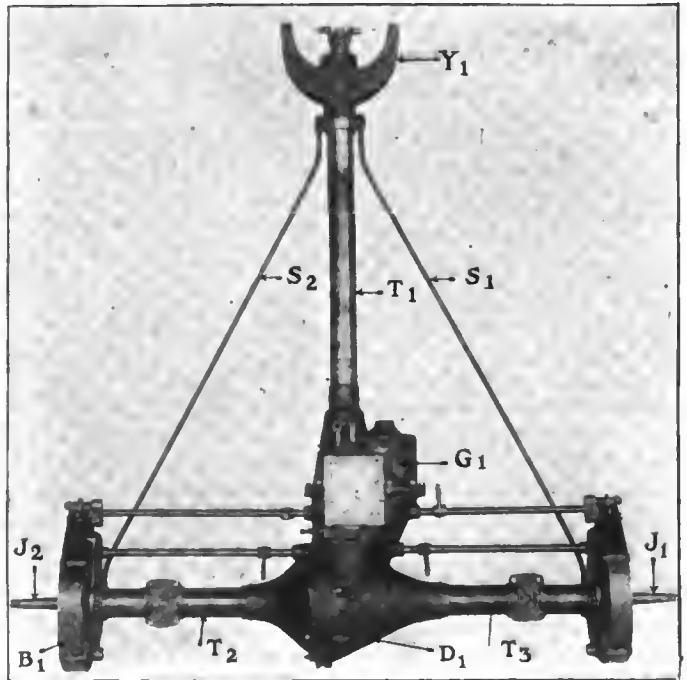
Live rear axle, with integral transmission, diagonal stays, and torsion tube with universal attachment
